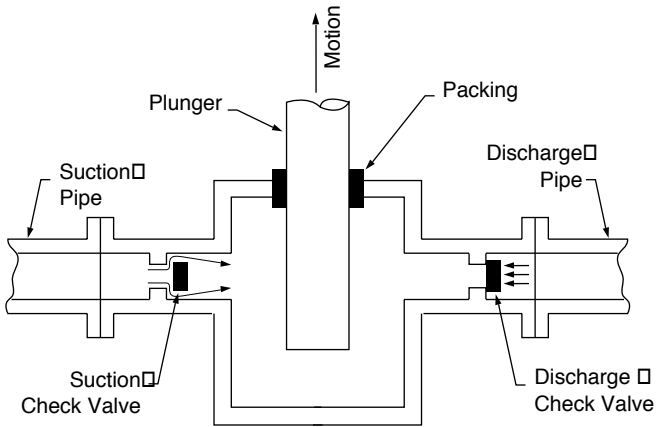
Liquid End of a Reciprocating Pump During the Suction Stroke
